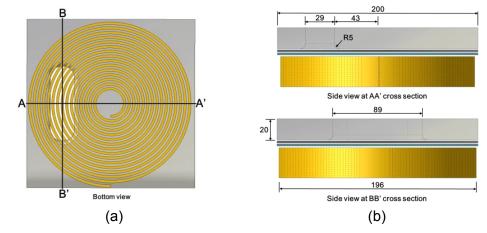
(a) Bottom view and (b) side view of the flat spiral coil and the open cavity die (unit: mm).
